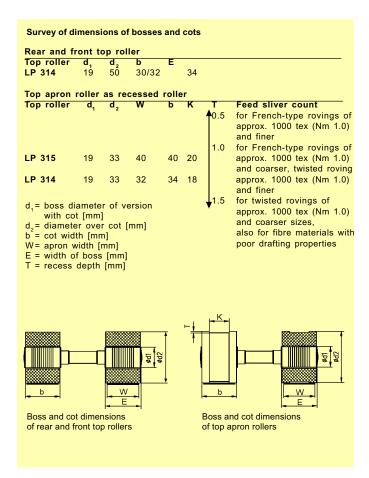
Fig. H: Top rollers with cot and boss dimensions for PK 6000
